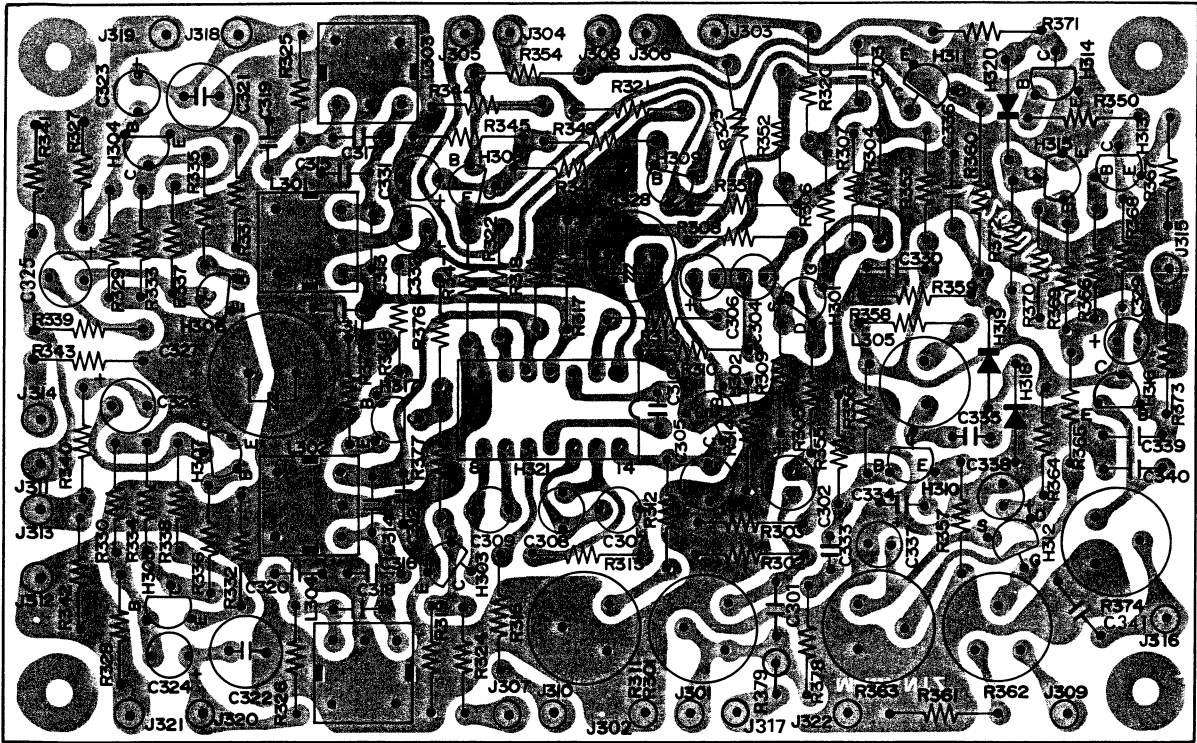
MPX Stereo Decoder, Noise and DC Amplifier Assembly P300 Component Locations
